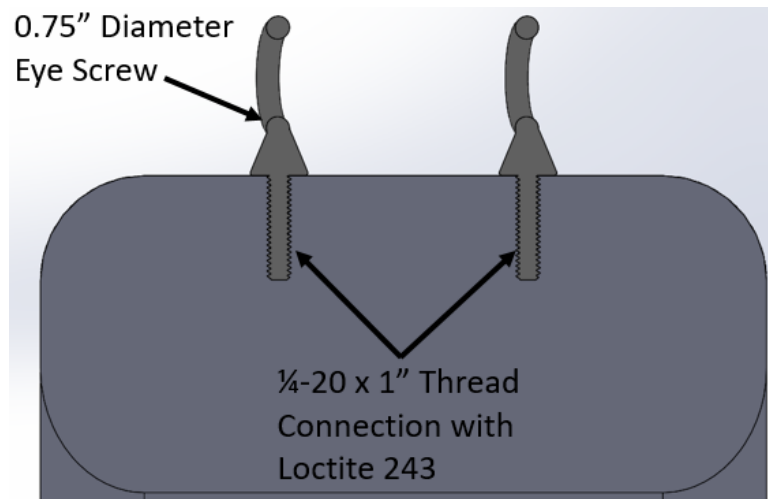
Cross Section of the Flight Test Design Tether to AGU Connection
